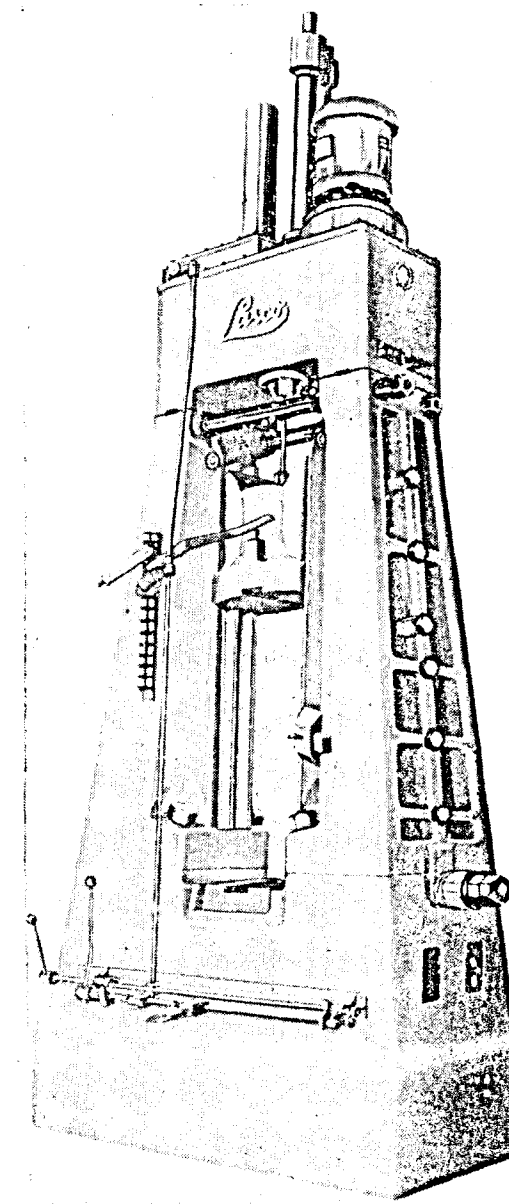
Electro-oil-hydraulic Drop Forging Hammer with separate V V-guides.
